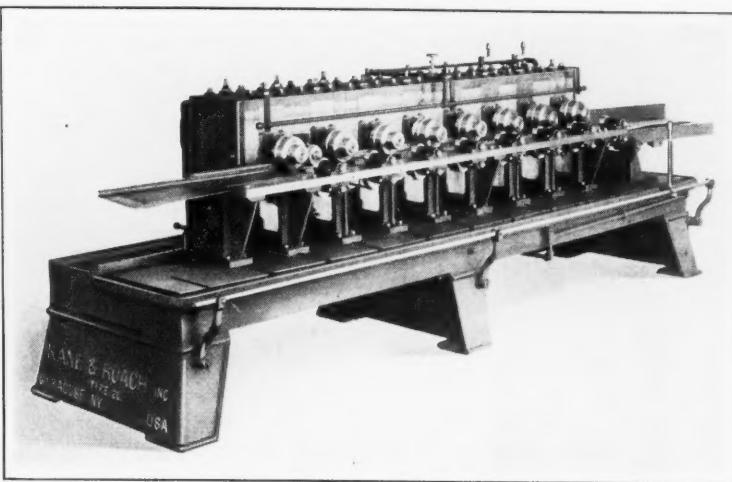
Cold-roll Forming Machine Built for Hemming Ford Running Boards in Soviet Russia
